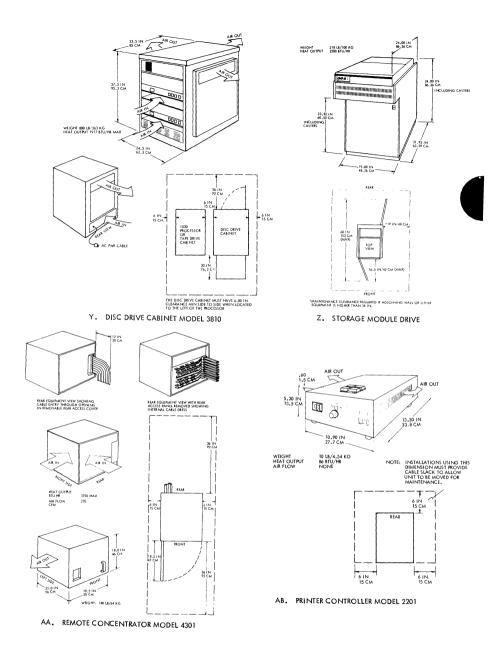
Cabling, Dimensions, Weight, Mounting Clearances, and Air Flow (Sheet 12 of 17)
